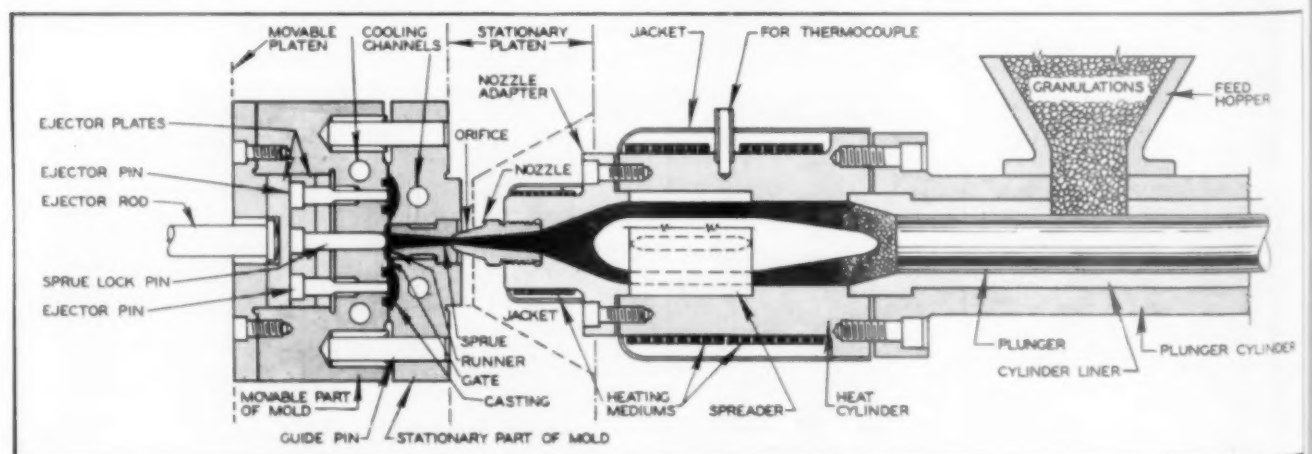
Above is a sectional view illustrating the general method of injection molding.
